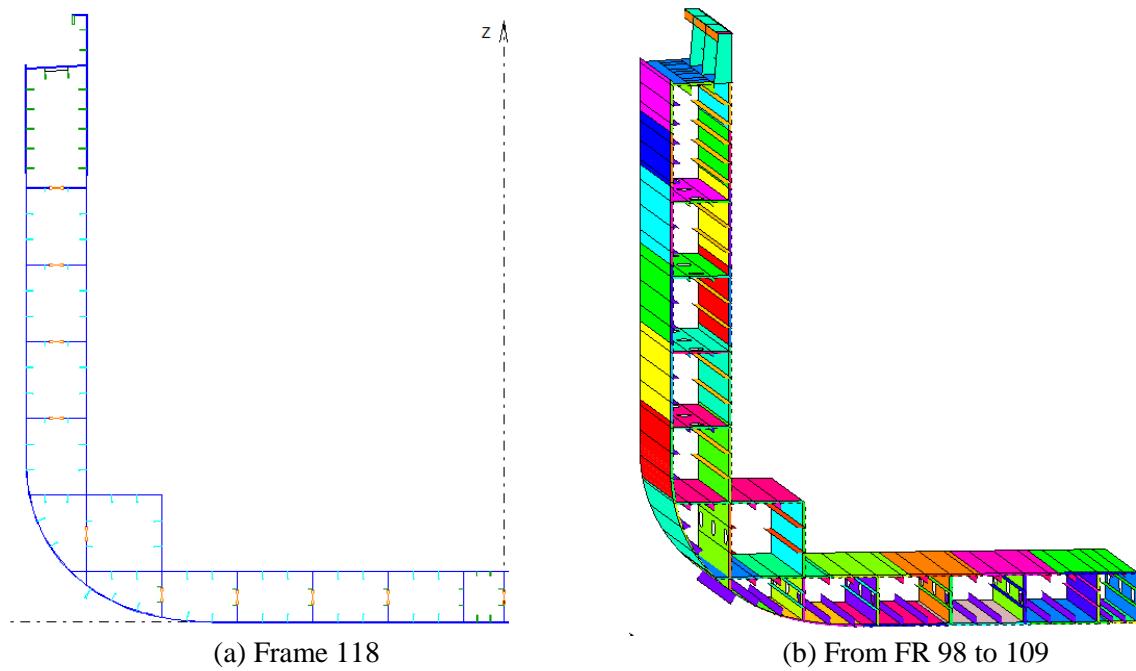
Longitudinal stiffeners and longitudinal members' holes arrangement
